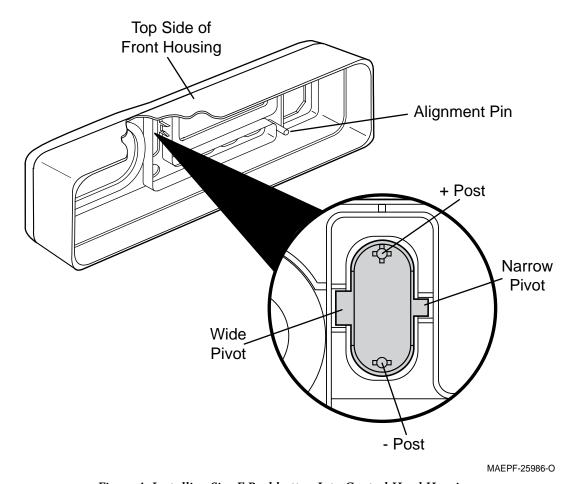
Installing Size F Pushbutton Into Control Head Housing
